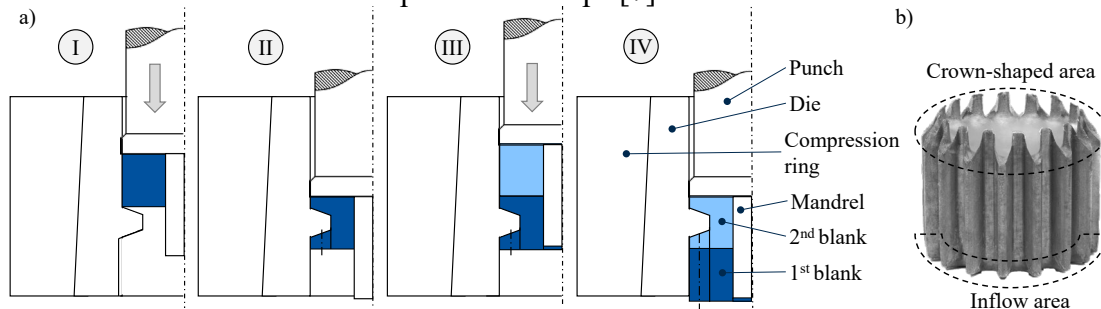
Samanta process, a) process principle, b) toothed workpiece (according to [8,9]).
